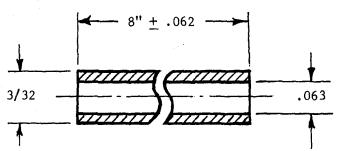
Fabrication Instructions for Evacuation Tube.
